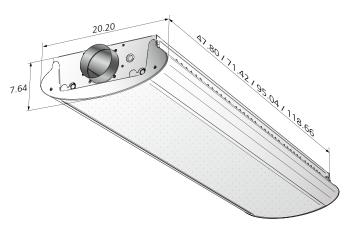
Dimensional drawing (in.) - ADRIATIC Ellips.
